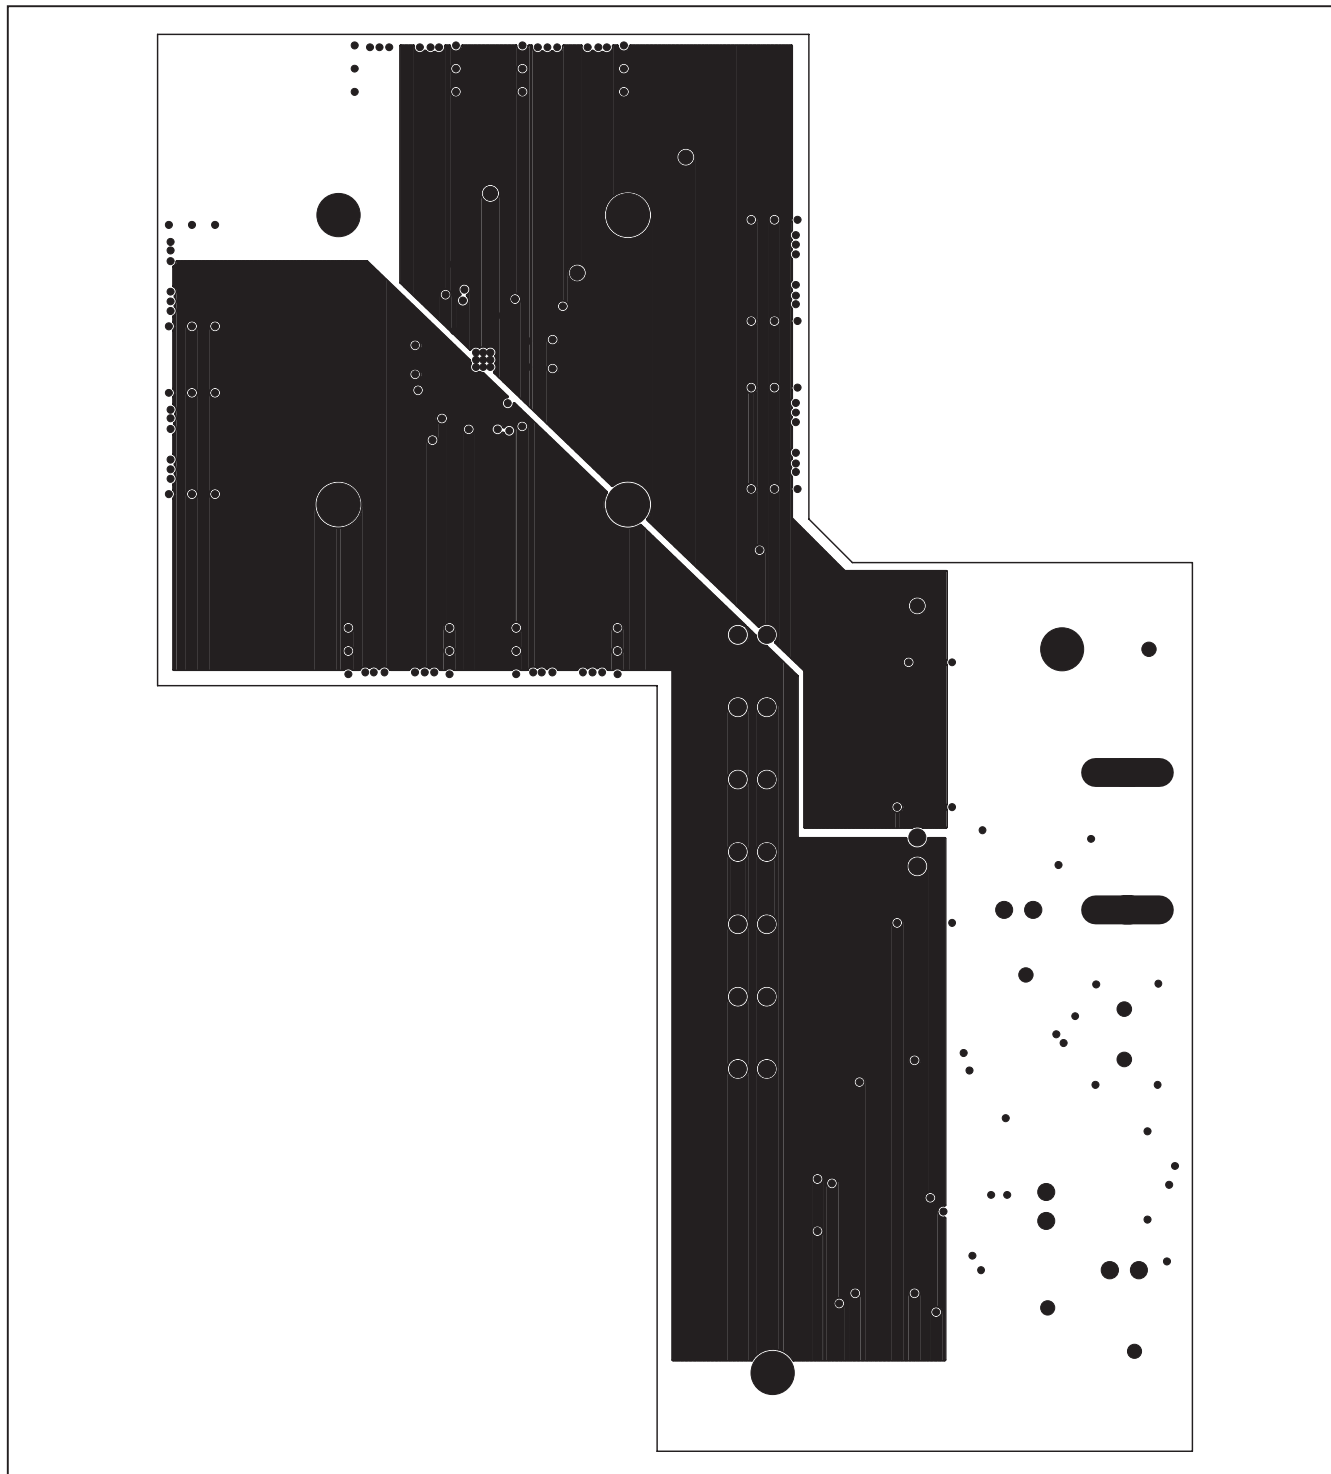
MAX3799 EV Kit PCB Layout—Power Plane
